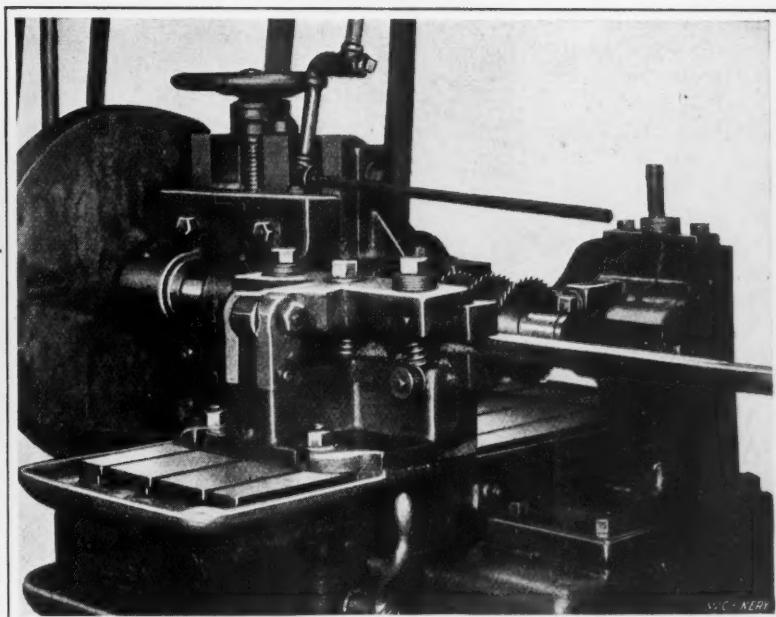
Cutting Bar Stock into Blanks on a Milling Machine equipped with Multiple Saws and a Holding Fixture
